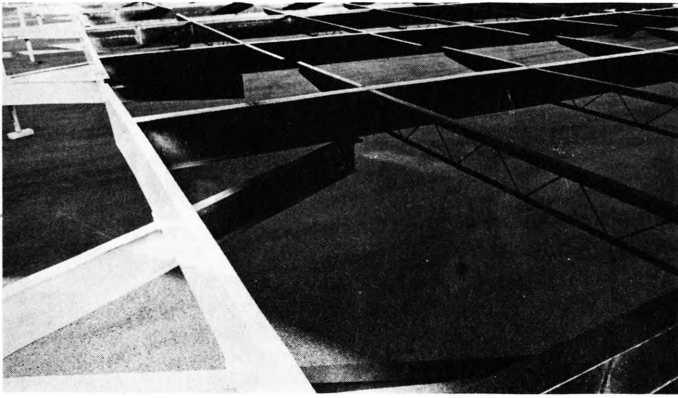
Sub-Assembly Station: Chassis (Twin Lakes Manufacturing Co., Tampa, Fla.)
